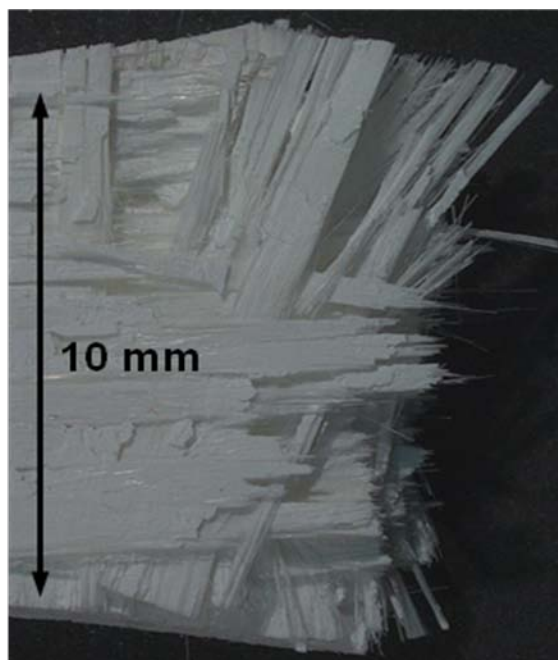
Fracture surface of the N720/AM specimen tested in creep at 131 MPa in laboratory air at 1100°C.
